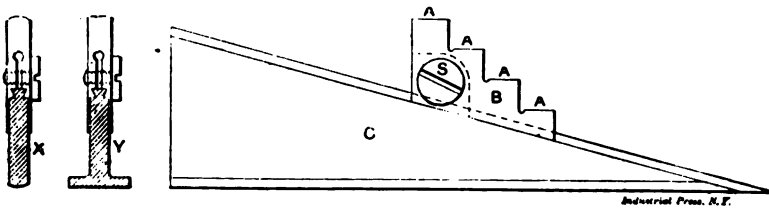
Adjustable Gage for Inside and Outside Measurements
